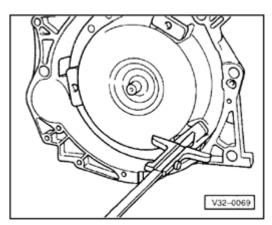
Checking Torque Converter Is Correctly Positioned Courtesy of VOLKSWAGEN UNITED STATES, INC.
